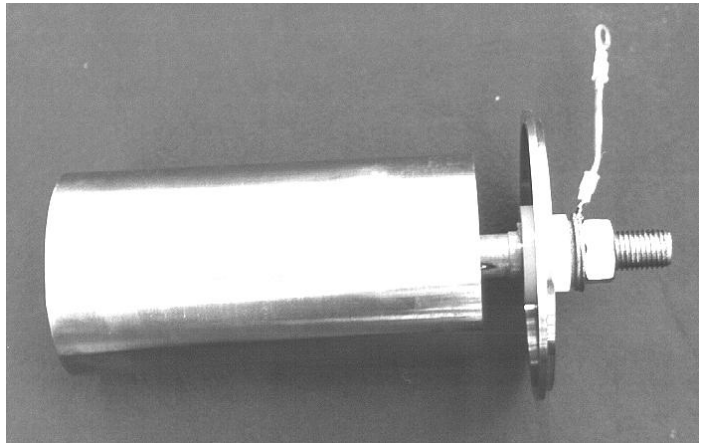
Cell - 5 cylinder. A view of the completed cylinder assembly
